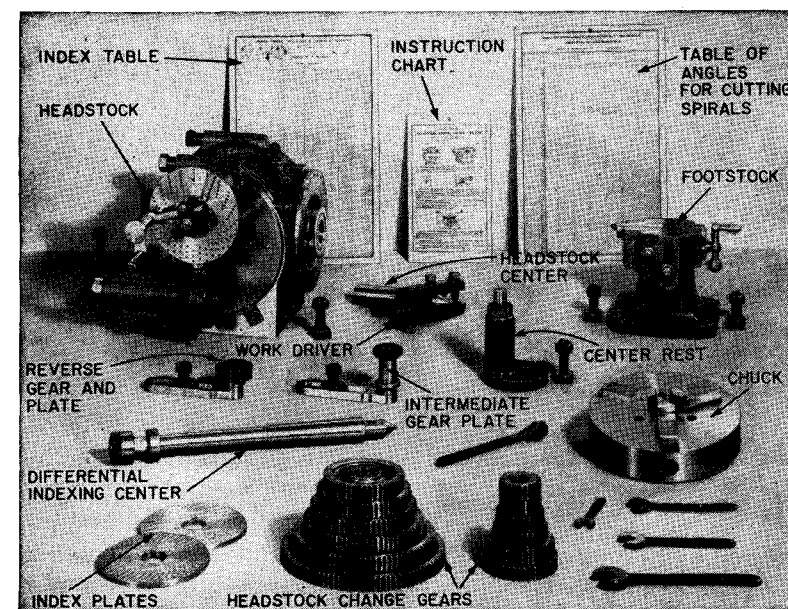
The universal spiral-index centers with full equipment. (The Brown & Sharpe Manufacturing Company)
